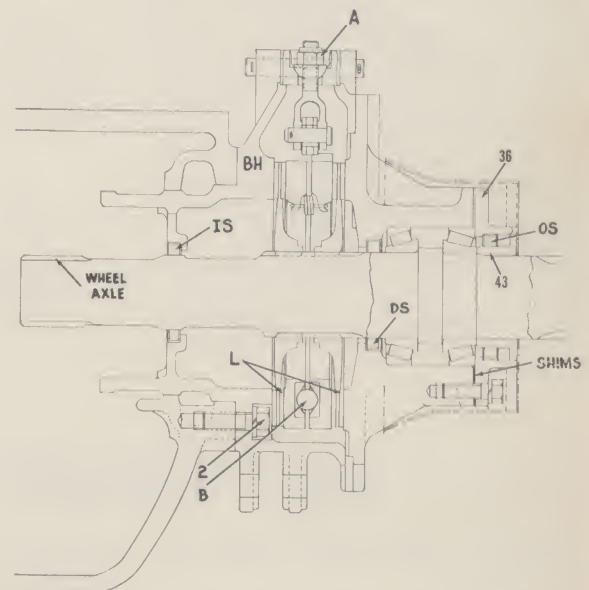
Sectional view of wheel axle shaft and disc brakes used on 4 speed Super 99 transmission. Brakes are adjusted by rotating the nut (A).
